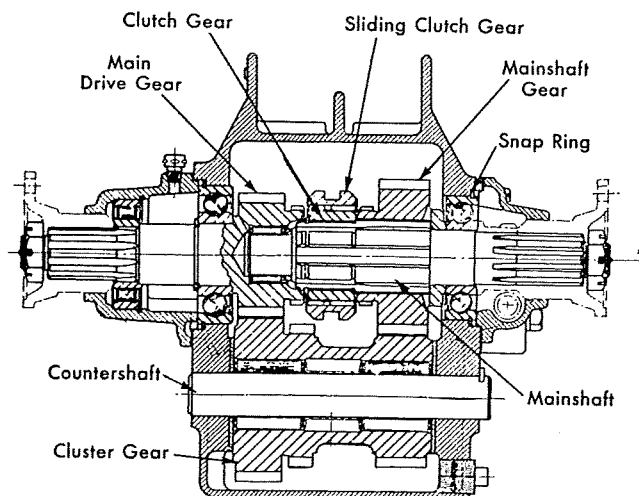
Group No. 60 Brown-Lipe 2321, 2323
